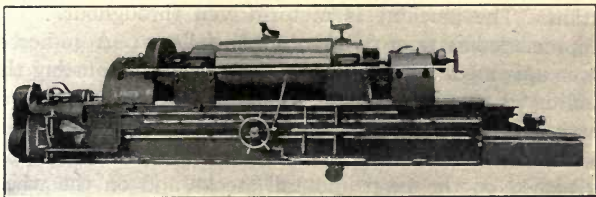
Landis grinding machine for finishing large steel-mill rolls.
